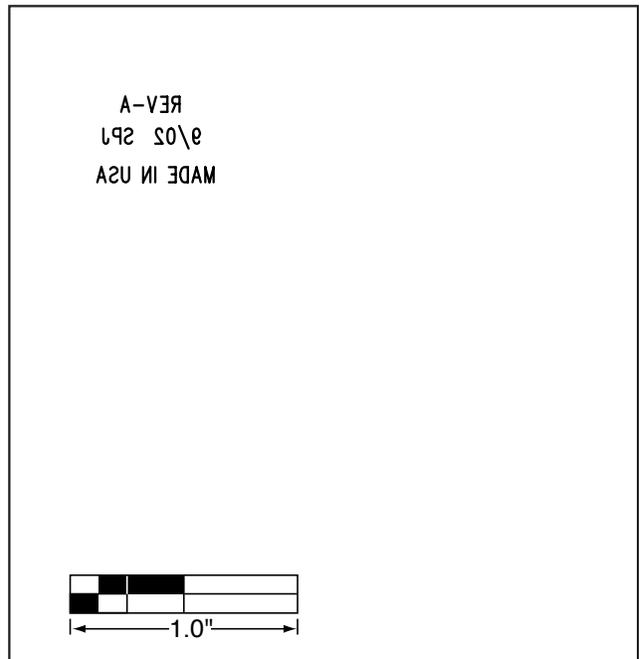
MAX9982 EV Kit PC Board Layout—Bottom Silkscreen
